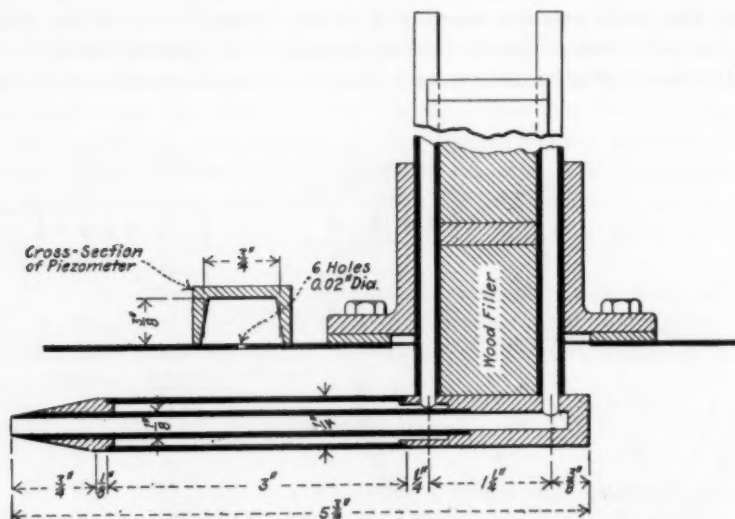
DIMENSIONED SKETCH OF PITOT TUBES A TO H
